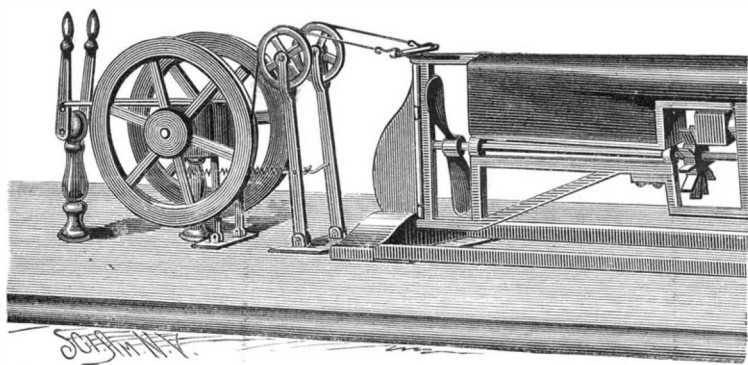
STEERING GEAR OF BERDAN TORPEDO.
